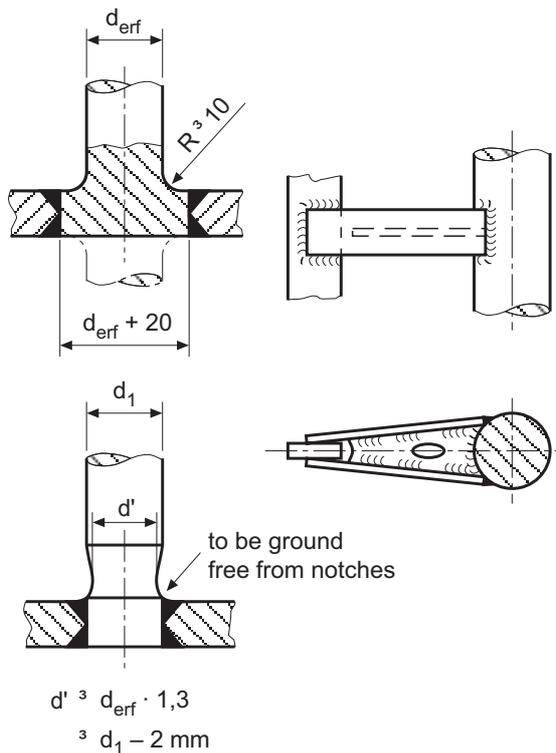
Welded joints between rudder (coupling plate) and stock
